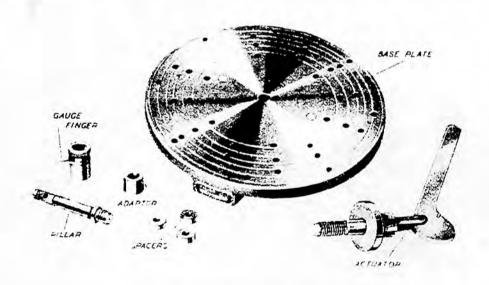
99 CLUTCH ASSEMBLY FIXTURE
